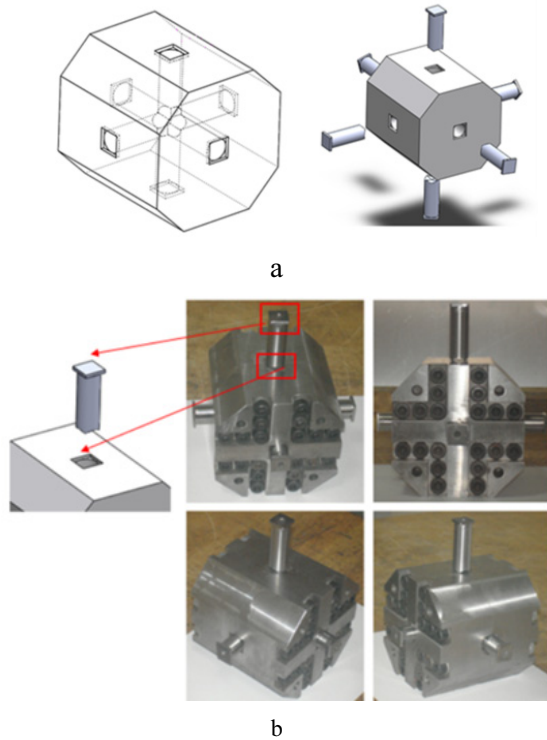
Designed and manufactured new ECAP die: a) designed 3D schematic illustrations of new ECAP die; b) manufactured ECAP die
